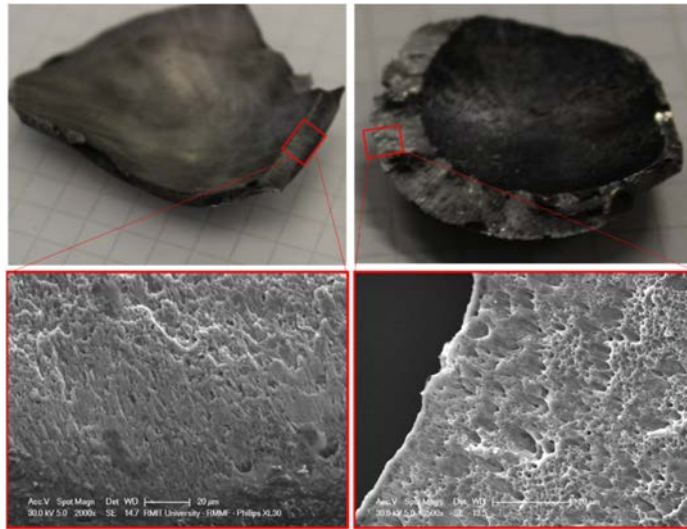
Fracture surfaces of ejected caps showing shear fracture modes across both candidate materials. Left: RHA, Right: HHA
